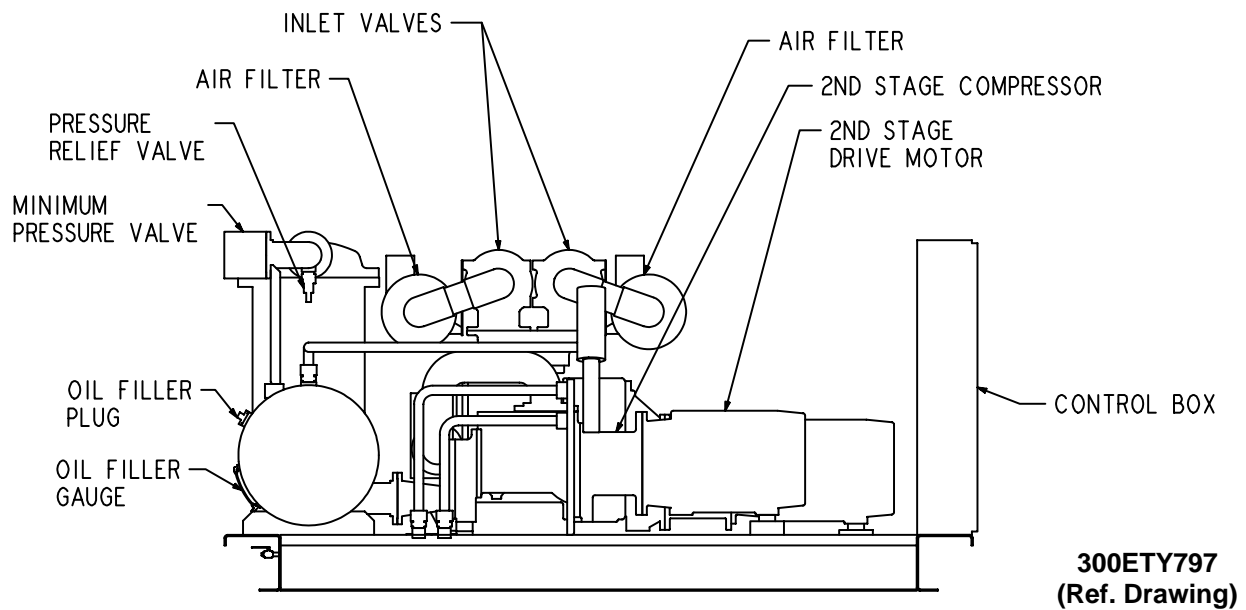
AIR COOLED UNIT – LESS ENCLOSURE – 2ND STAGE COMPRESSOR SIDE
